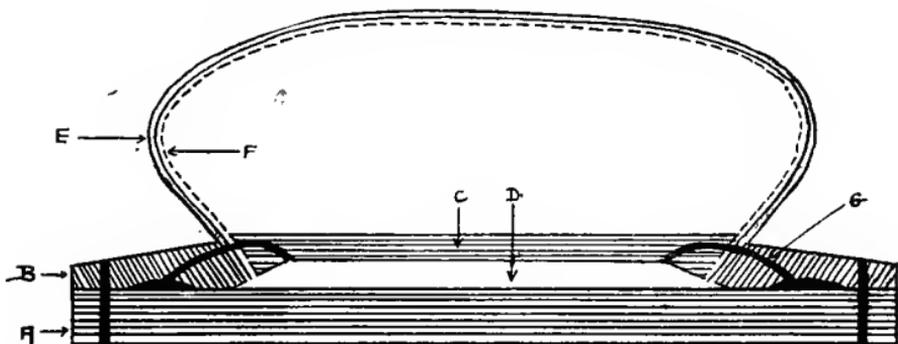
Goodyear welt shoe. Cross section. Sole, welt, insole and fill exaggerated.
